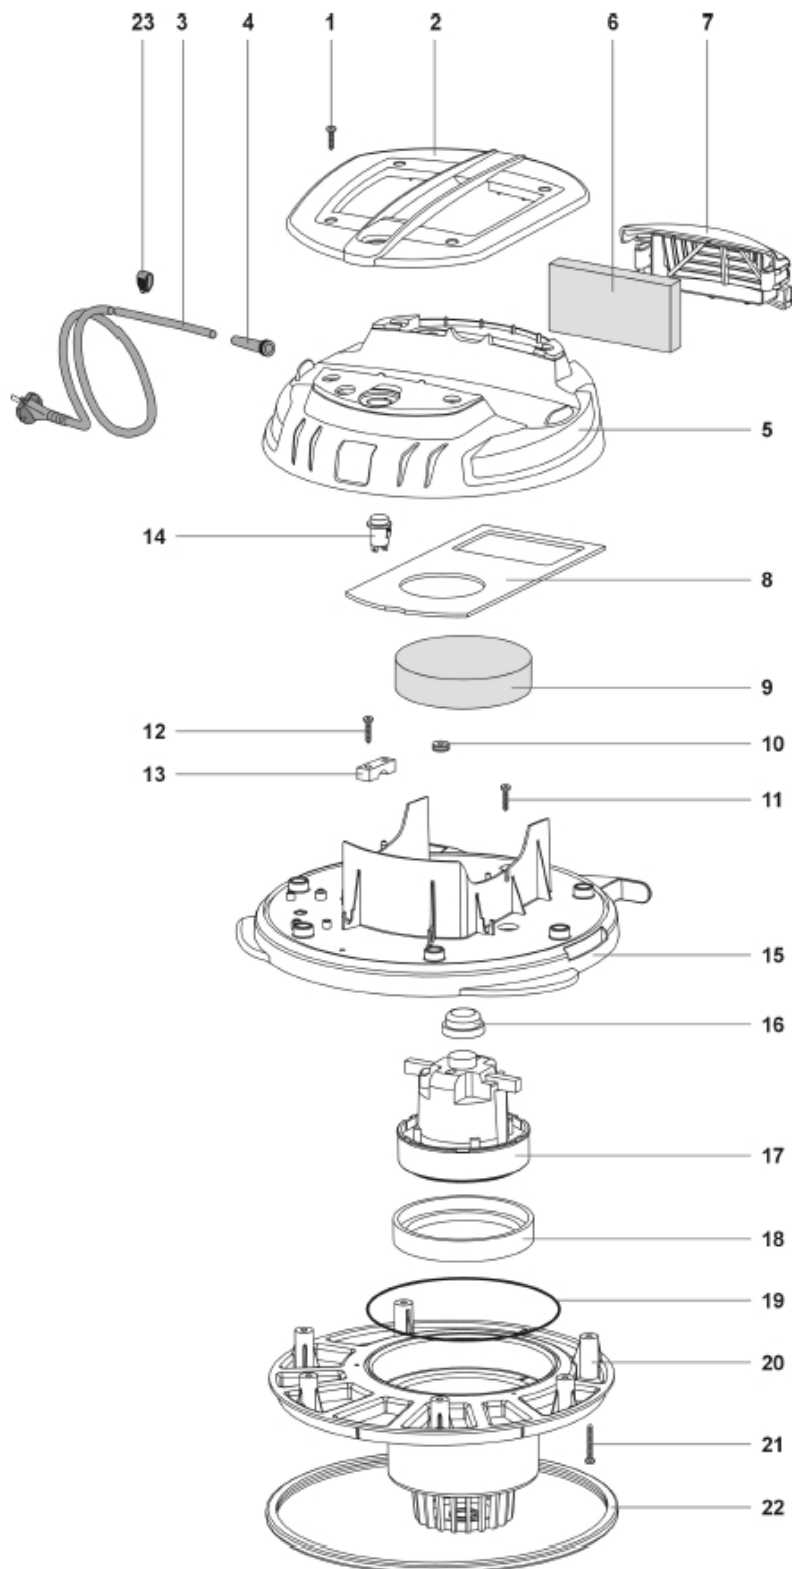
Spare parts drawing 1, head, flexCAT 112 Q
